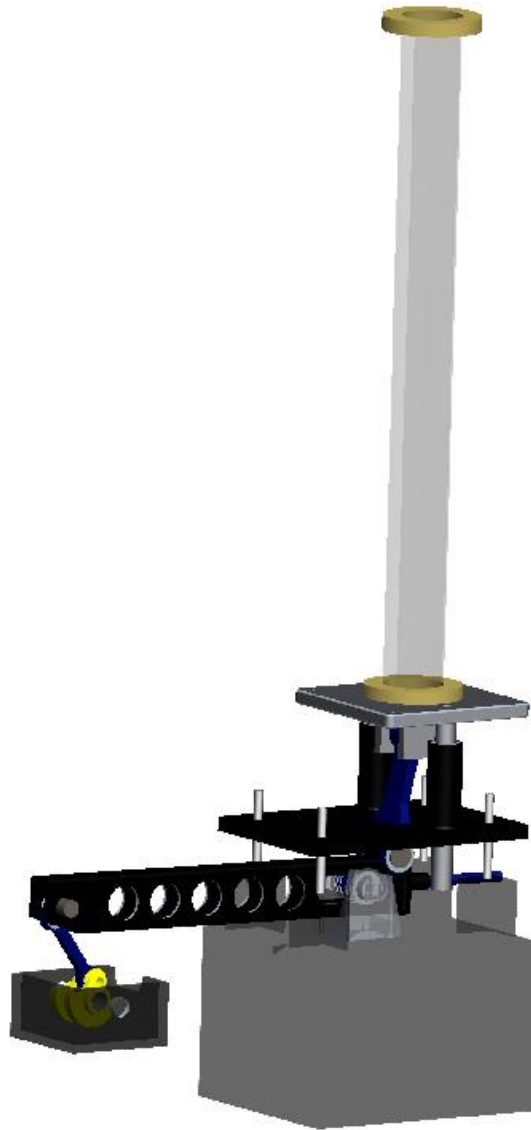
RB shaker assembled in Pro-E Mechanism
